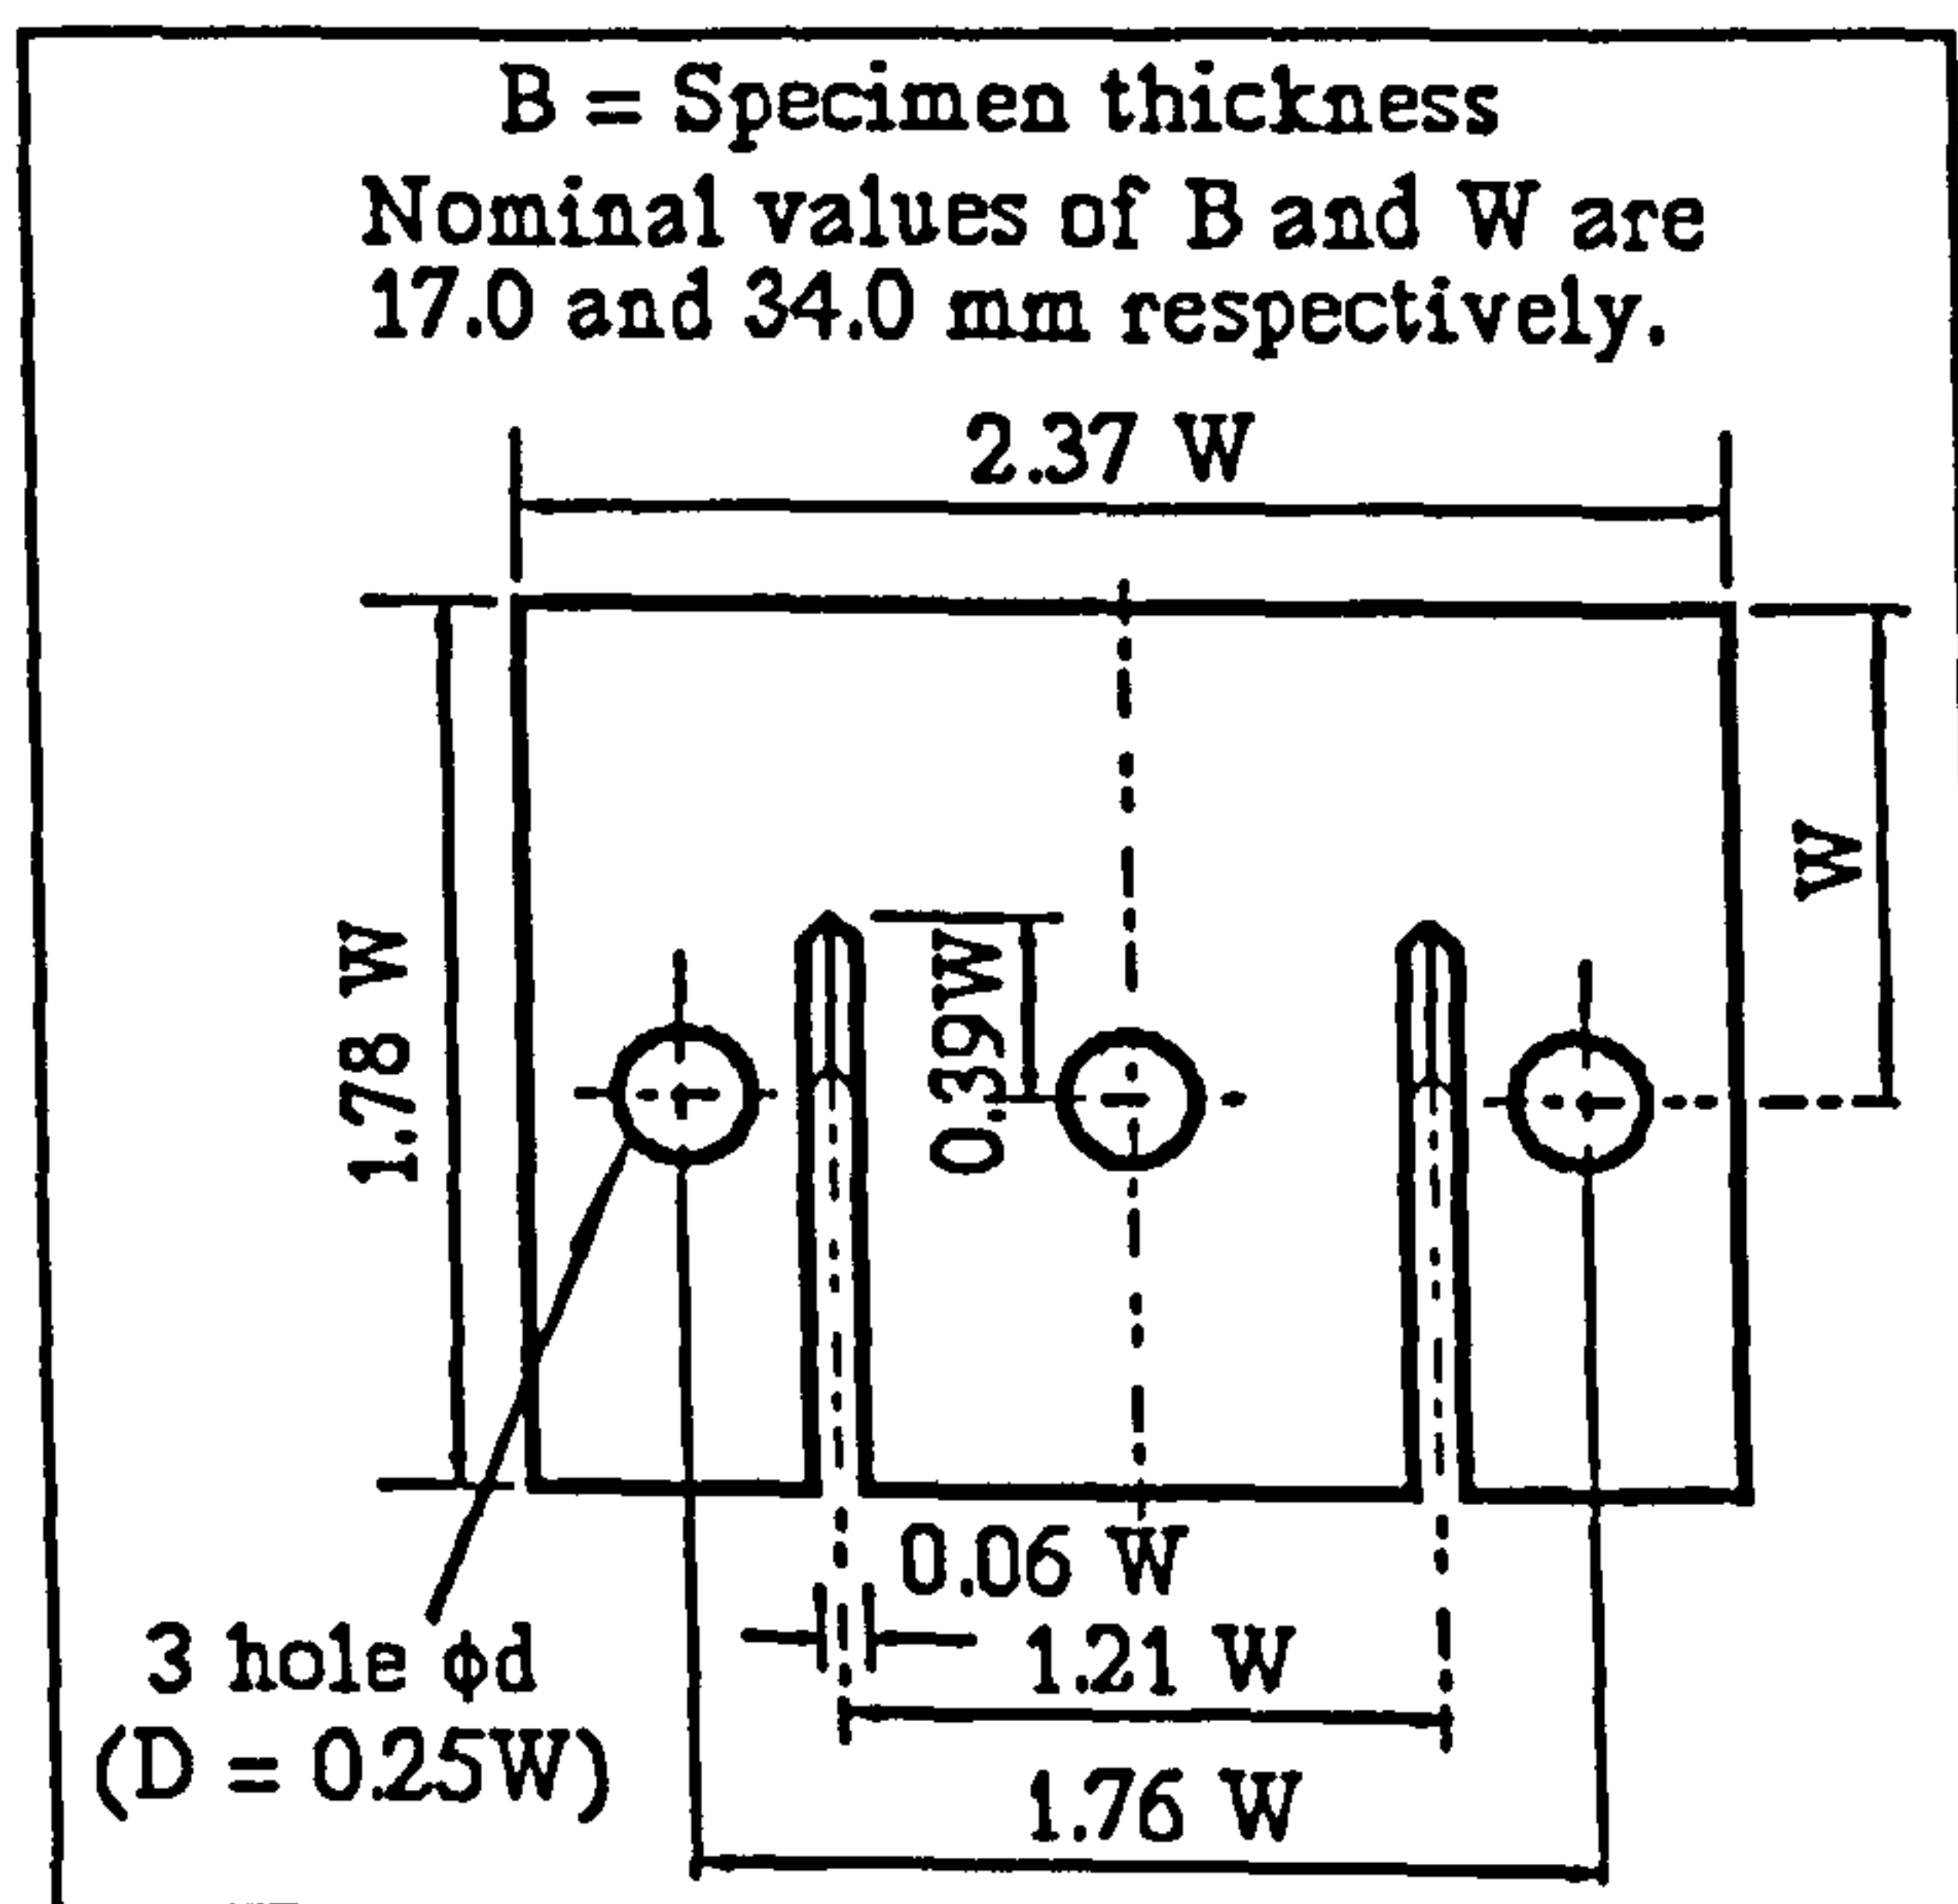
The CMM chevron-notched specimen before fatiguing.
